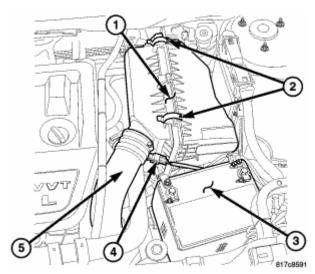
AIR CLEANER HOUSING Courtesy of CHRYSLER LLC
